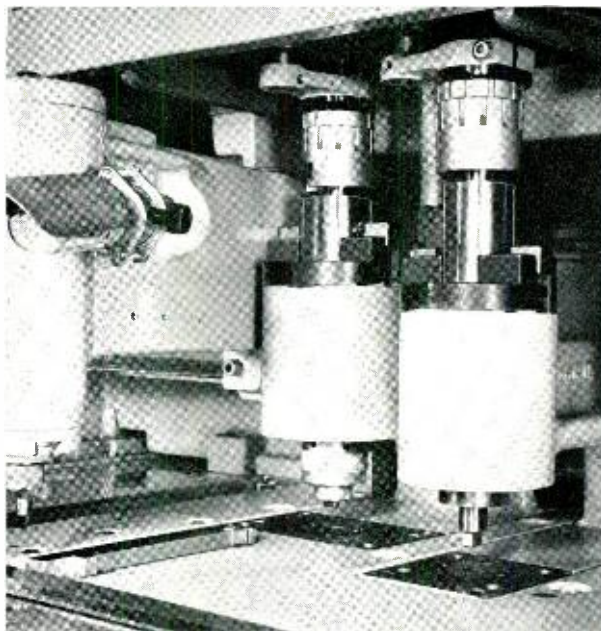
Close-up view showing punch and carriage section of card-coding tool.
